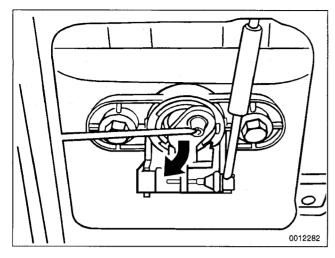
Pull off luggage compartment lock actuating rod in the direction of arrow.
